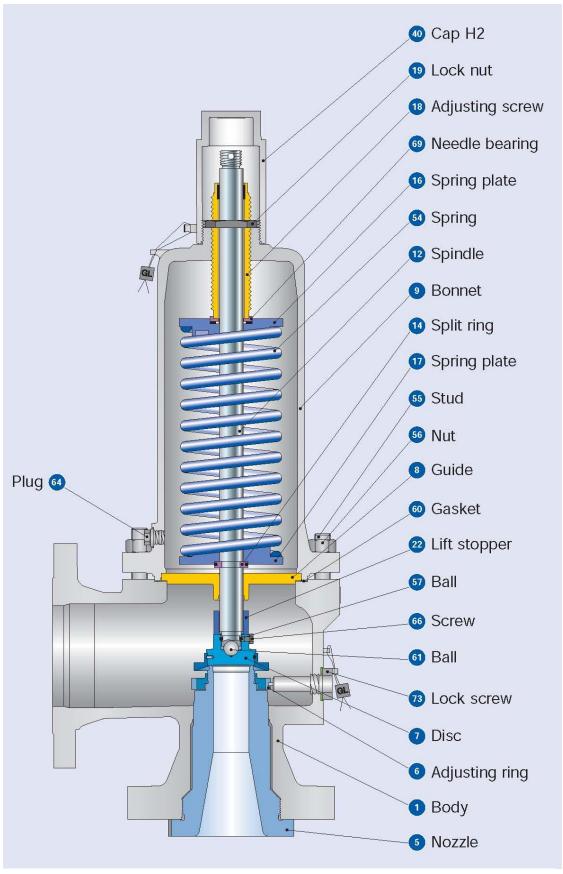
Parts of a Conventional Spring Loaded Safety Valve – Flanged
